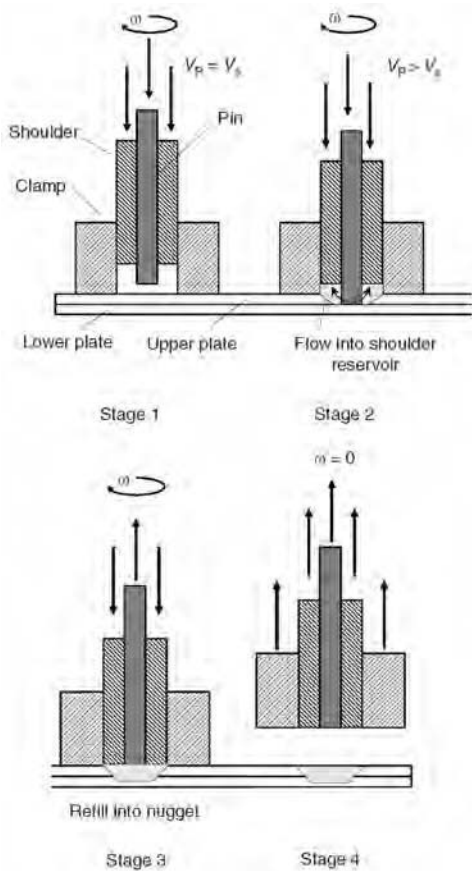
Schematic diagram of refill friction stir spot welding process. Source: Ref 109
